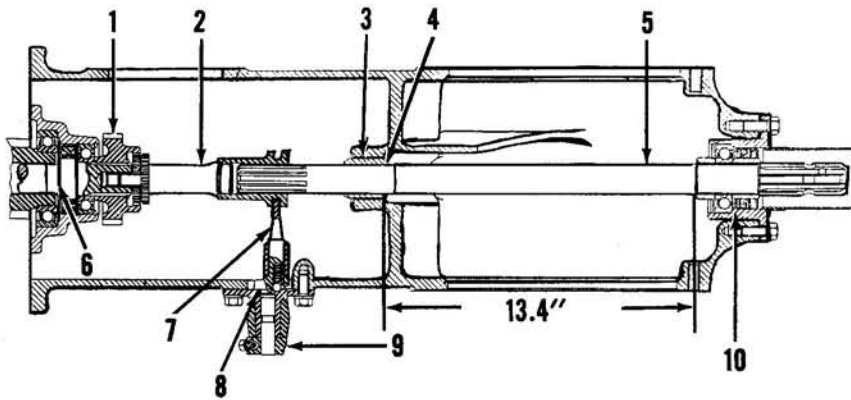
Sectional view of rear pto train. Sliding connector pilots in pto countershaft and meshes in internal splines in hydraulic pump drive gear when pto is engaged.
